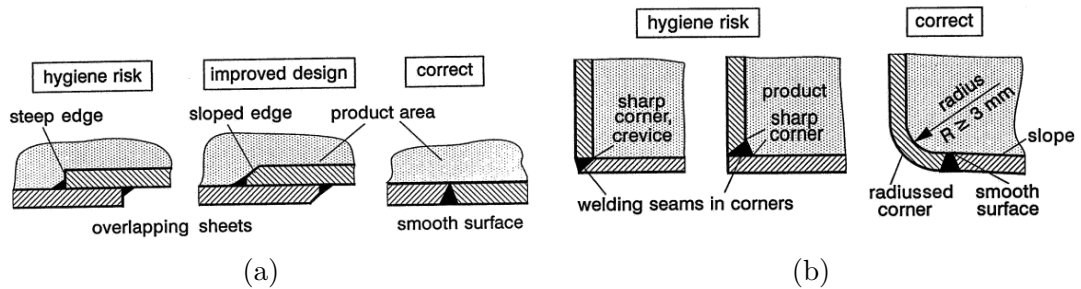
(a) Overlapping welded sheets should be avoided to prevent gaps and soil accumulation; instead, an aligned smooth surface welded outside the production area is preferred. (b) Corner welding should be avoided in favor of radiussed corners and butt-welding. Adapted from [18].
